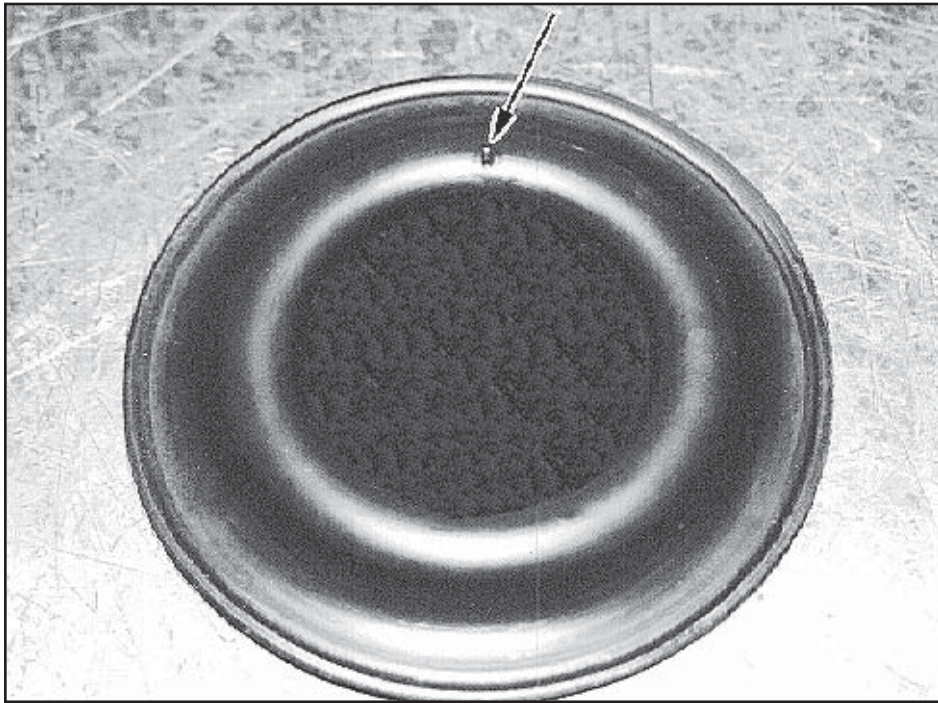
Accumulator Diaphragm—note small hole at 12 o'clock position caused by undercharging or loss of charge pressure.
